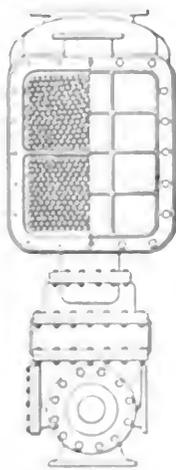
SURFACE CONDENSER MOUNTED ON A BOILER. AIR AND CIRCULATING PUMP
